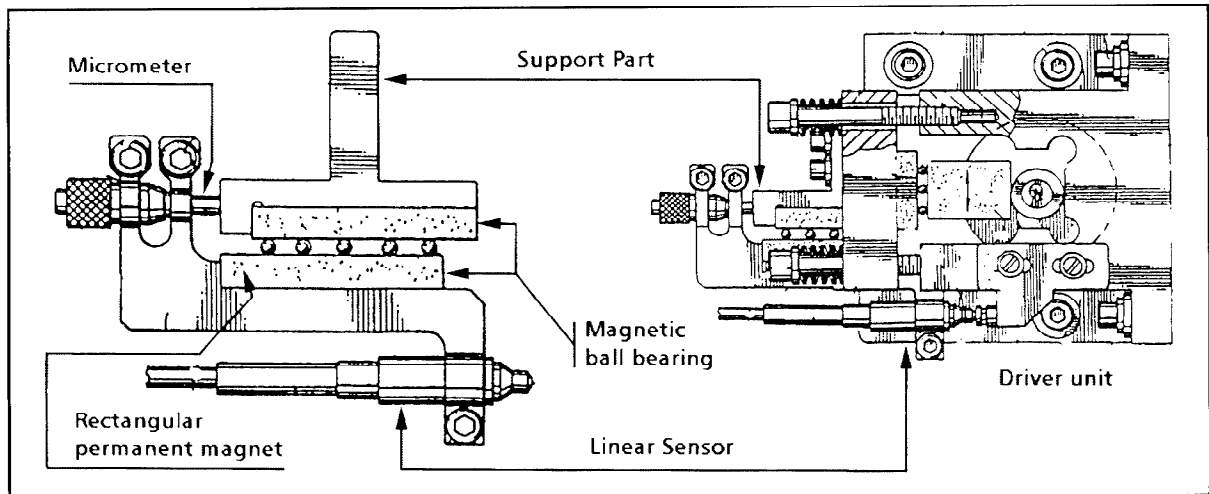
Linear Adjustment Measurement Device for a Driver Unit Design [12]
